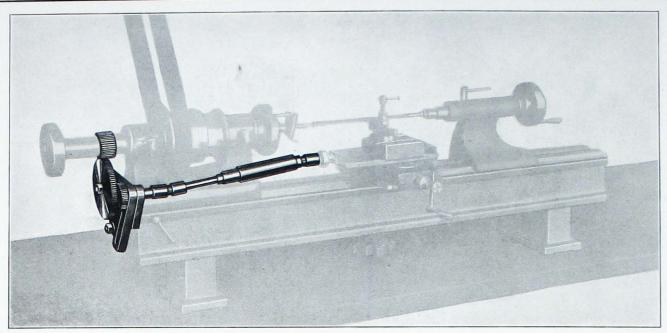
Thread Cutting Attachment Installed on Lathe.
